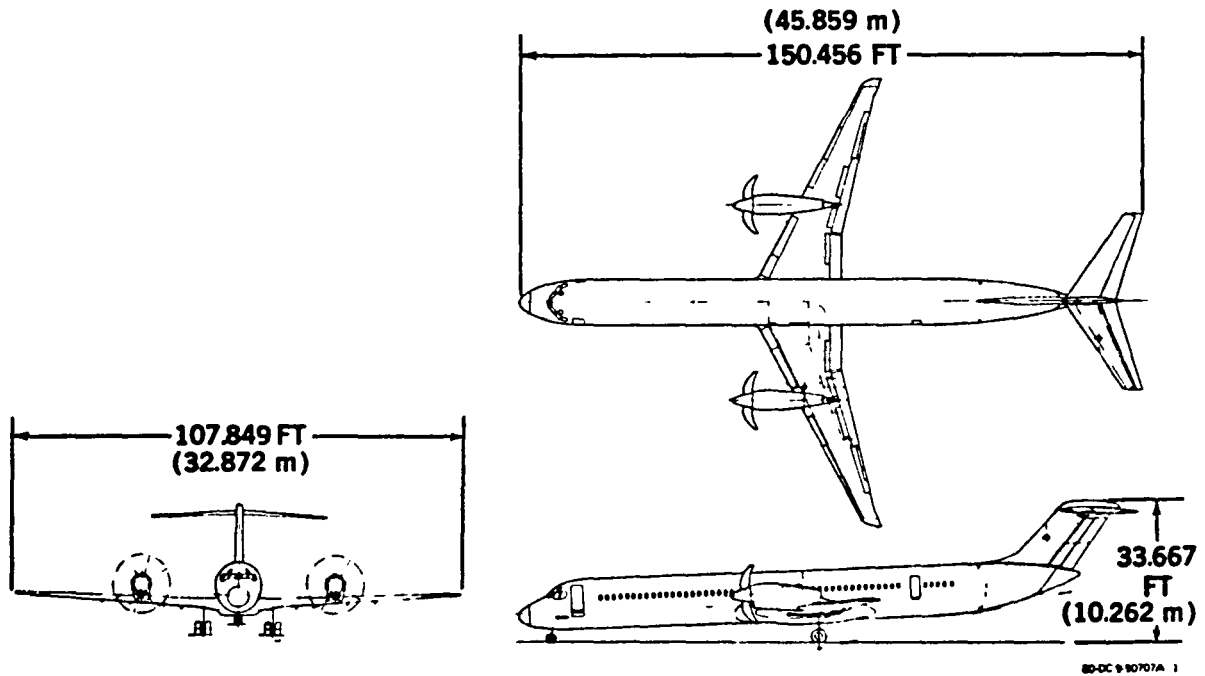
GENERAL ARRANGEMENT – WING-MOUNTED PROPFAN, CONFIGURATION 1
